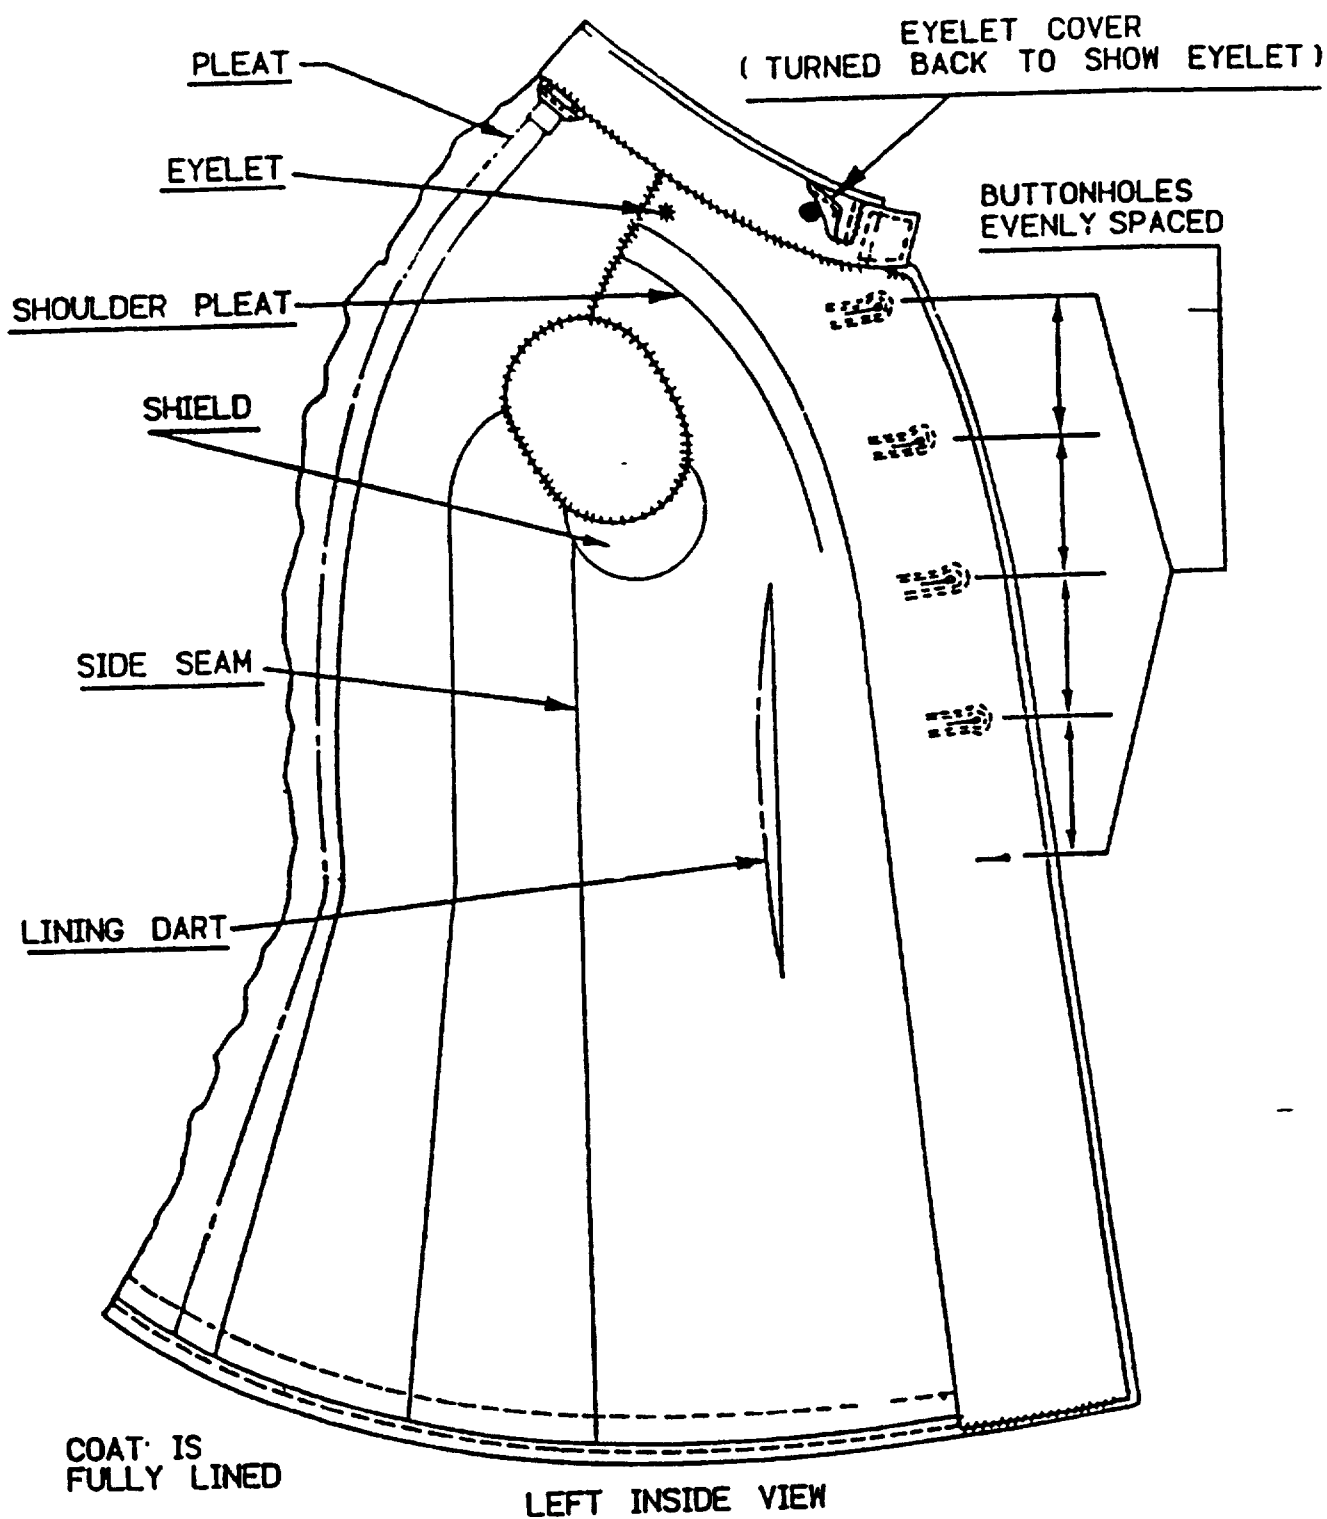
COAT, MAN'S: SCARLET, DRUM AND BUGLE CORPS
